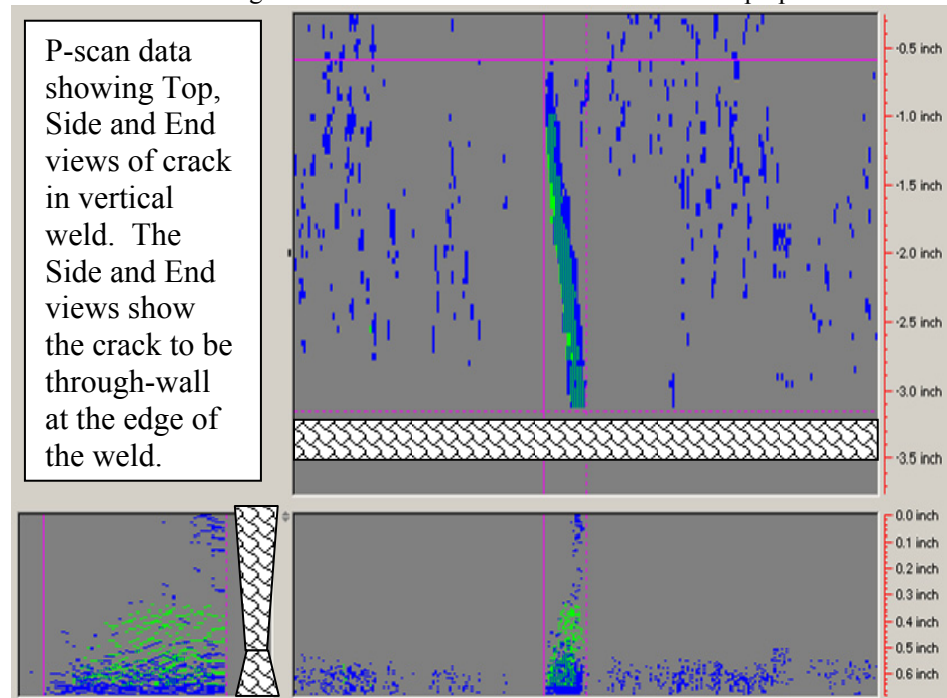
IP182 Vertical Weld Salt Nodule
